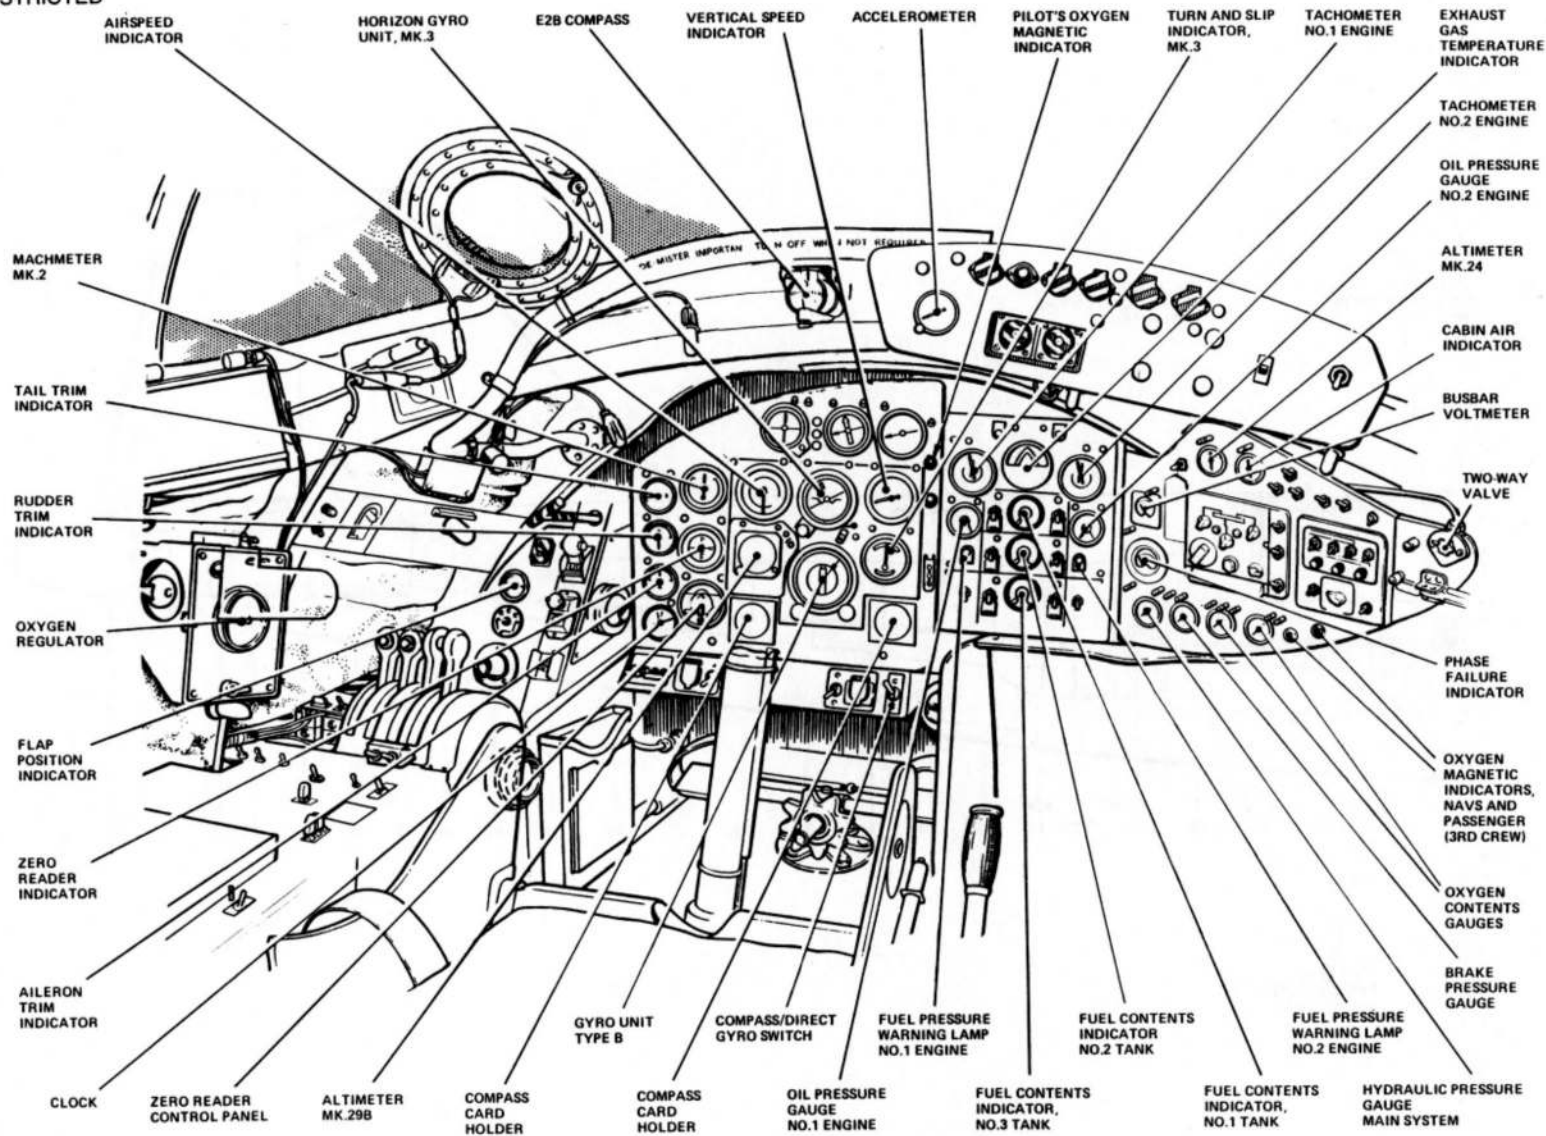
INSTRUMENT INSTALLATION - PILOT'S STATION
